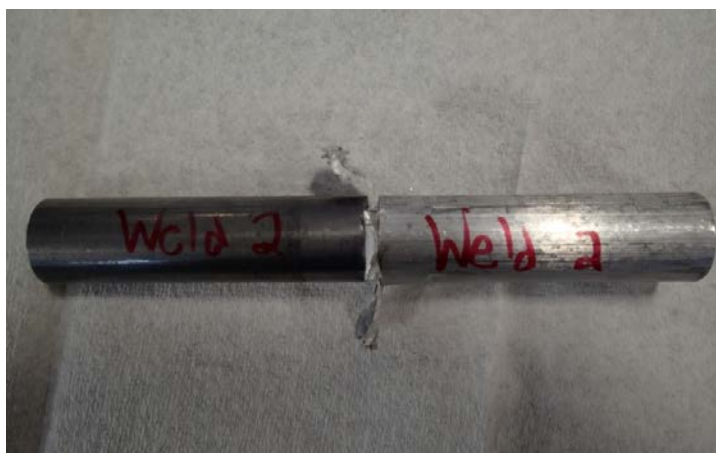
As-welded aluminum-to-steel joint.
